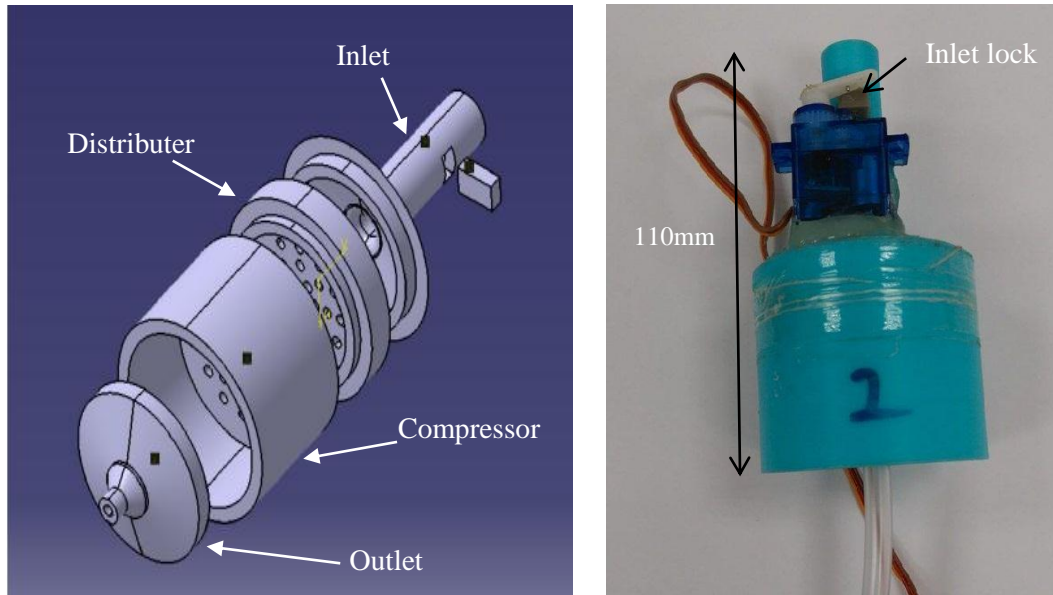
3D view of sampling device (left) and sampling device after printed using 3D printer.
